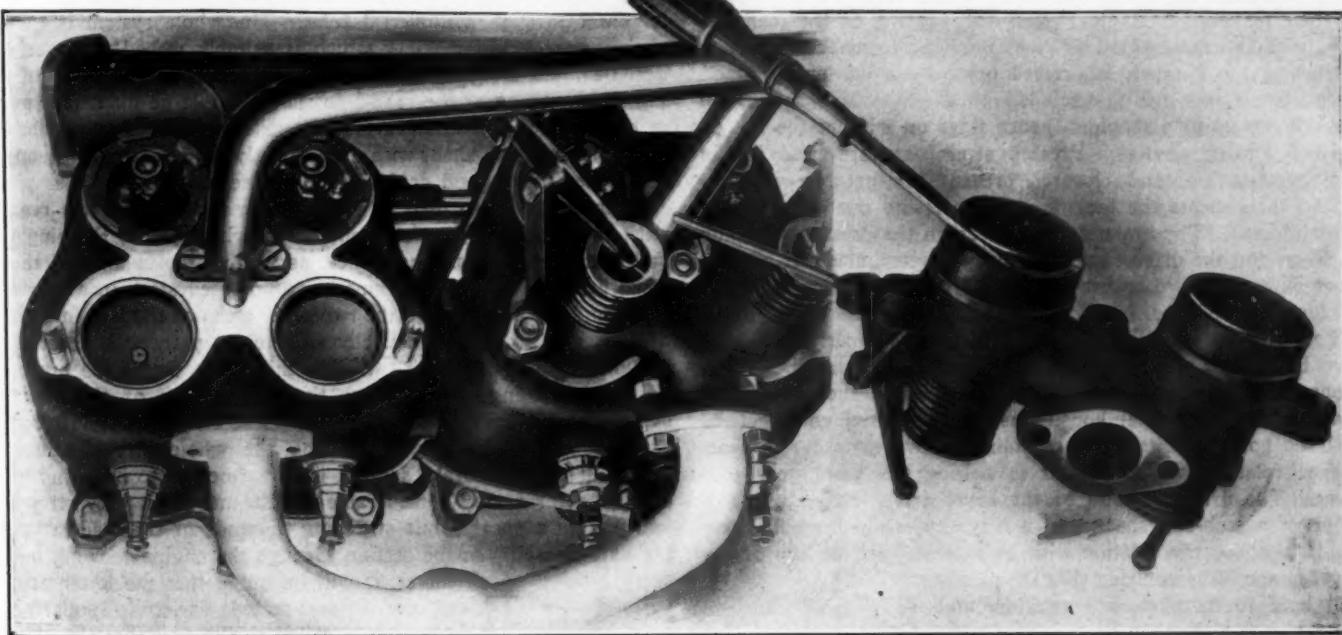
Looking down on the motor presenting details of valves in the head with one pair removed and presented at the right
